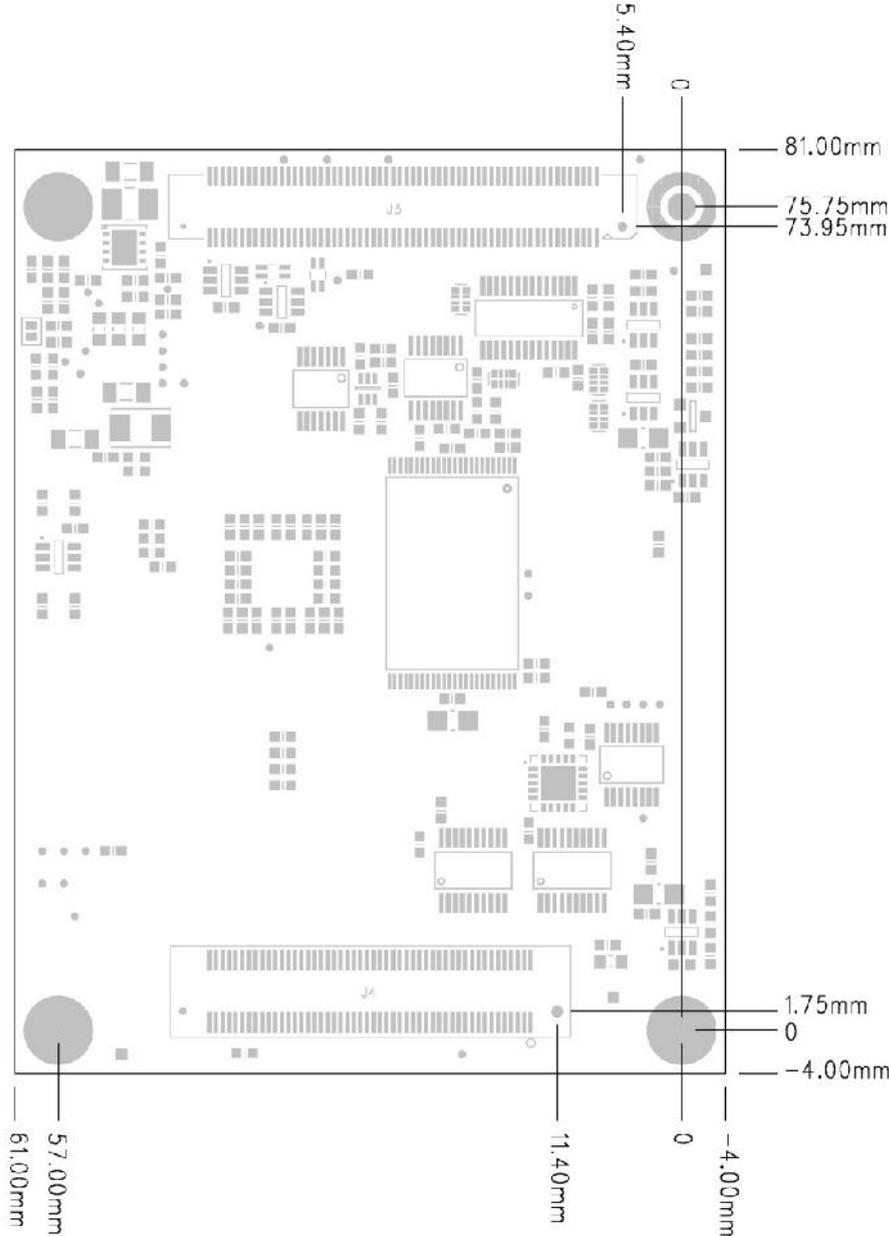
BOTTOM SIDE CONNECTOR POSITIONS
